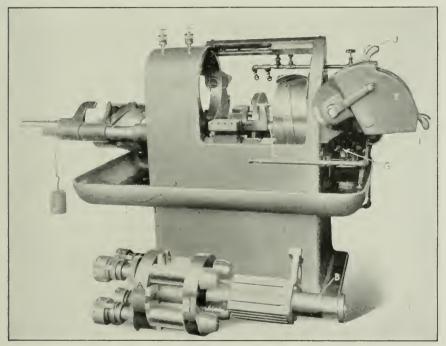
Gridley Multiple-Spindle Automatic Turret Lathe with Spindles and Tool Slides Removed
